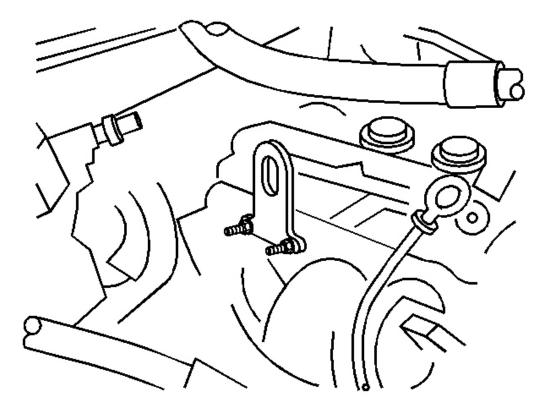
View Of Transmission Cooler Lines & Clips Courtesy of GENERAL MOTORS CORP.
